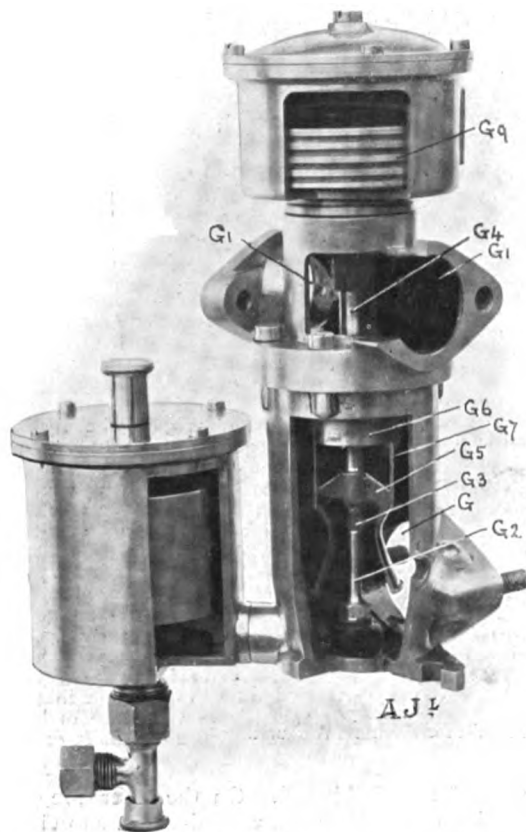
View of the Brotherhood automatic Carburettor, cut open to show the interior.
